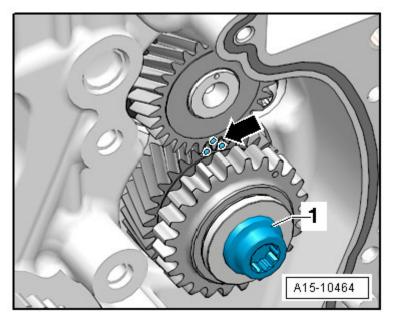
Identifying Intermediate Shaft Sprocket Courtesy of VOLKSWAGEN UNITED STATES, INC.
